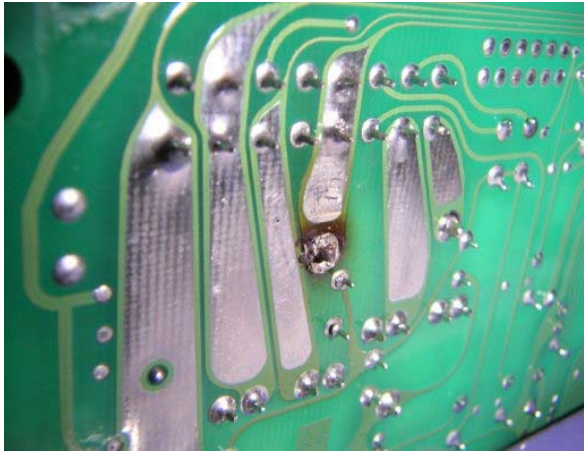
Example of a dry solder joint with localised overheating to the printed circuit board [46].
